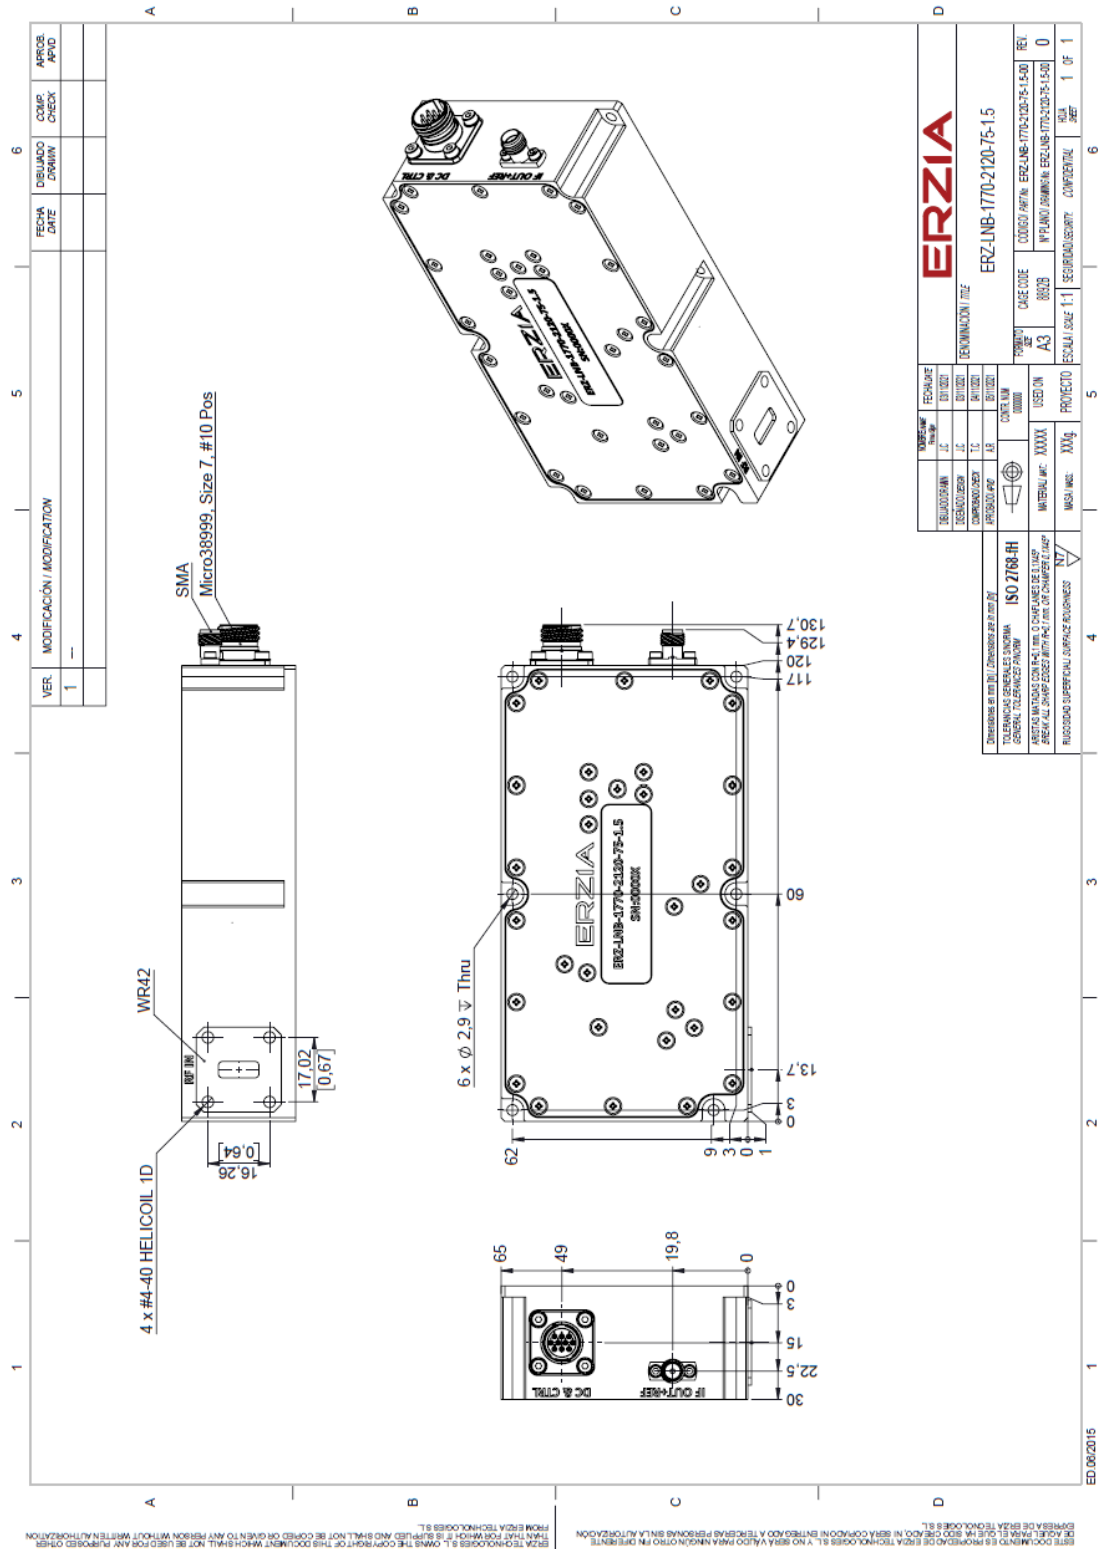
ERZ-LNB-1770-2120-75-1.5 Outline Drawing
